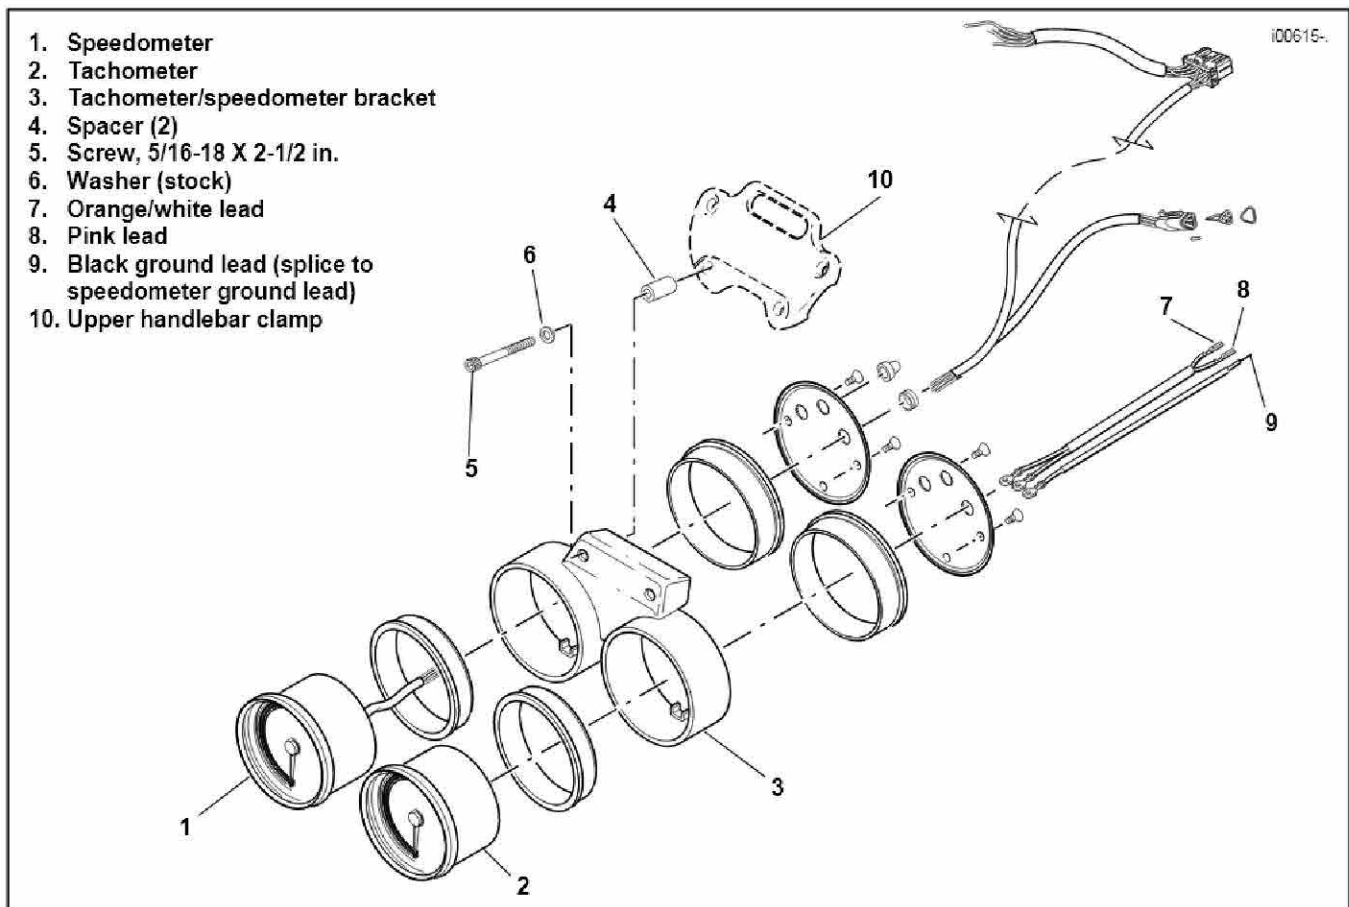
Exploded View Of Speedometer And Tachometer Installed In Double Bracket
